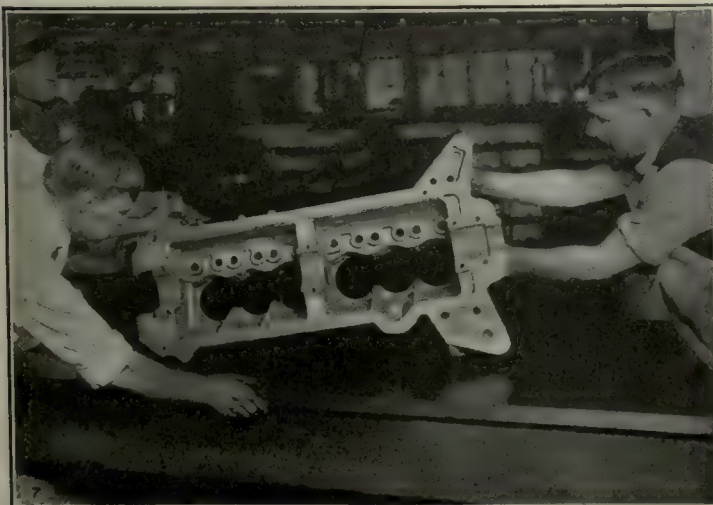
INSPECTION OF JOINT. FIG. 8—GAGING THE CRANKCASE
